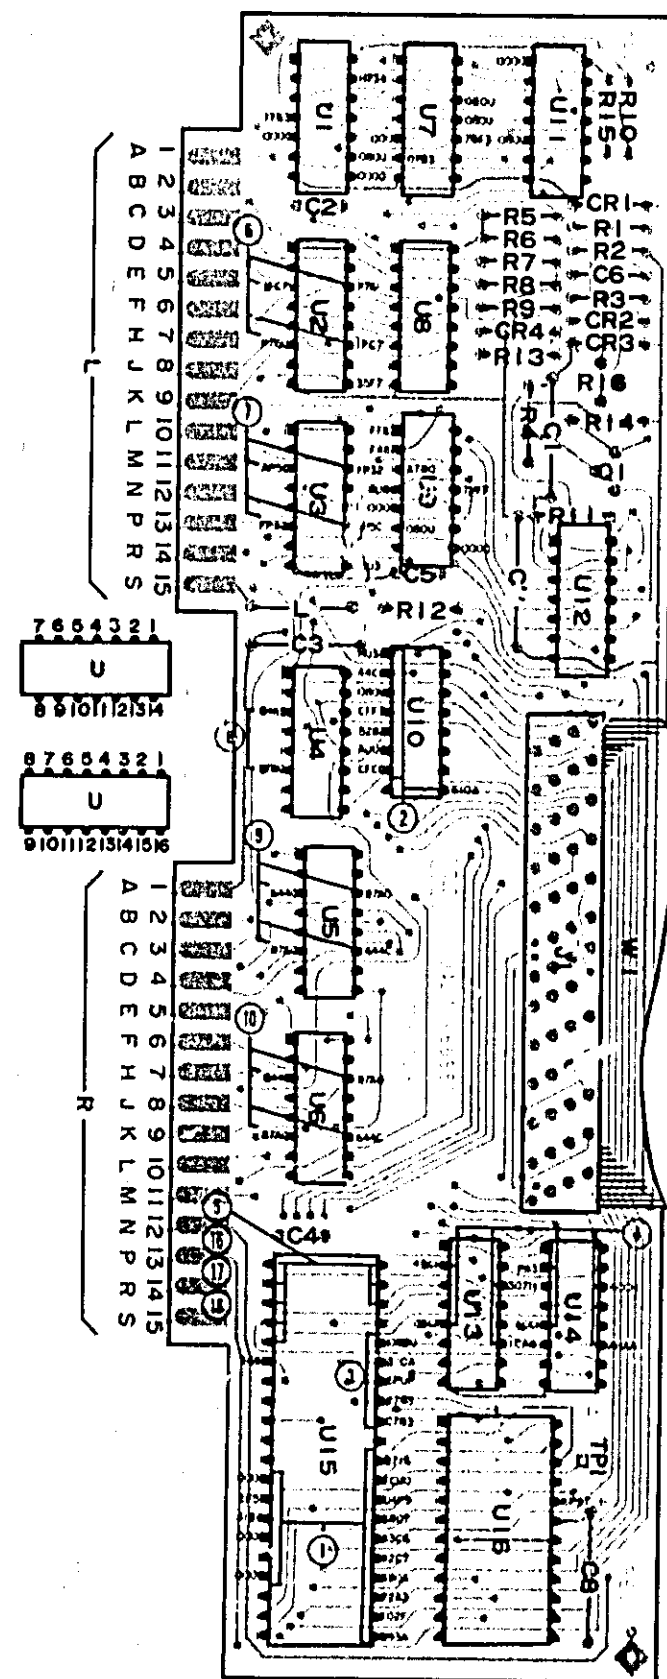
A31 HP-IB CPU Board Assembly Component Locations.
